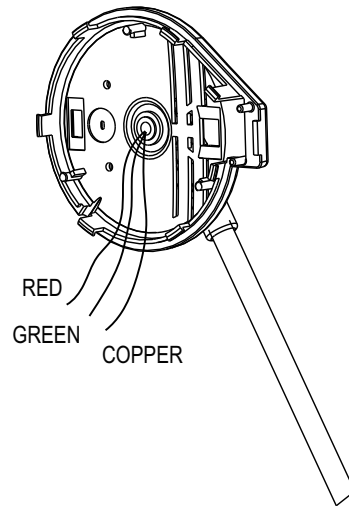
Airman 850 Headset, Boom Assembly Reference View
